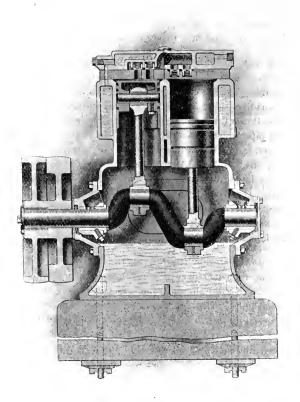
FIG. I. SECTIONAL VIEW OF SMALL COMPRESSOR.
